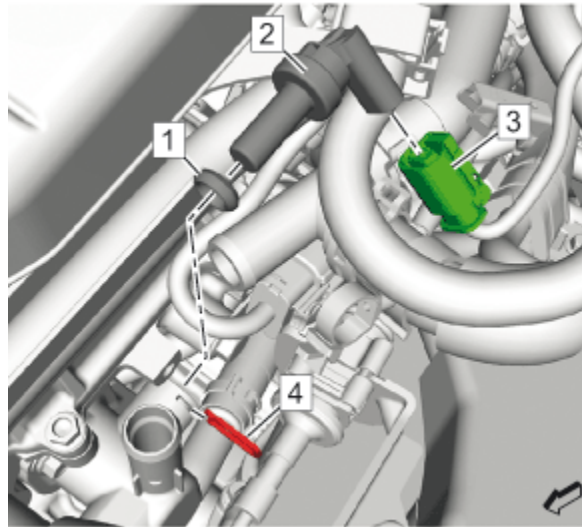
Engine Coolant Temperature Sensor, Electrical Connector, Retainer And Seal
